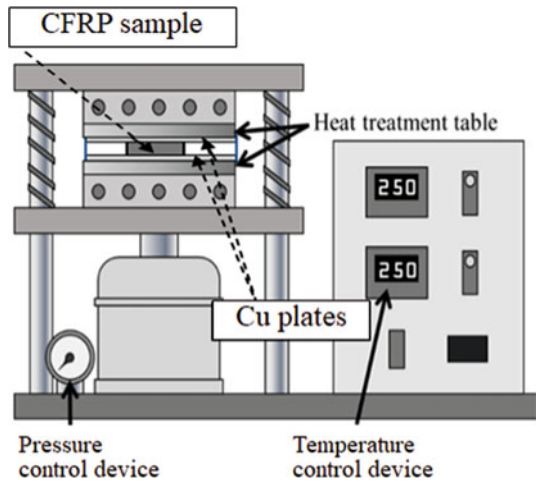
Hot-press and heating machine (Type IMC-185A)
